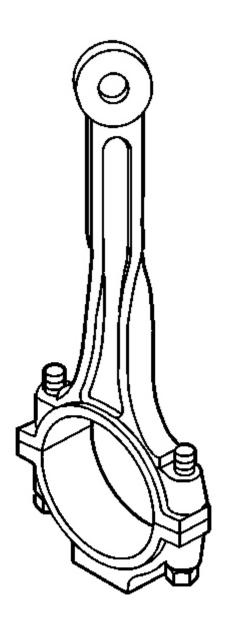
Identifying Twisted Connecting Rod Courtesy of GENERAL MOTORS CORP.
